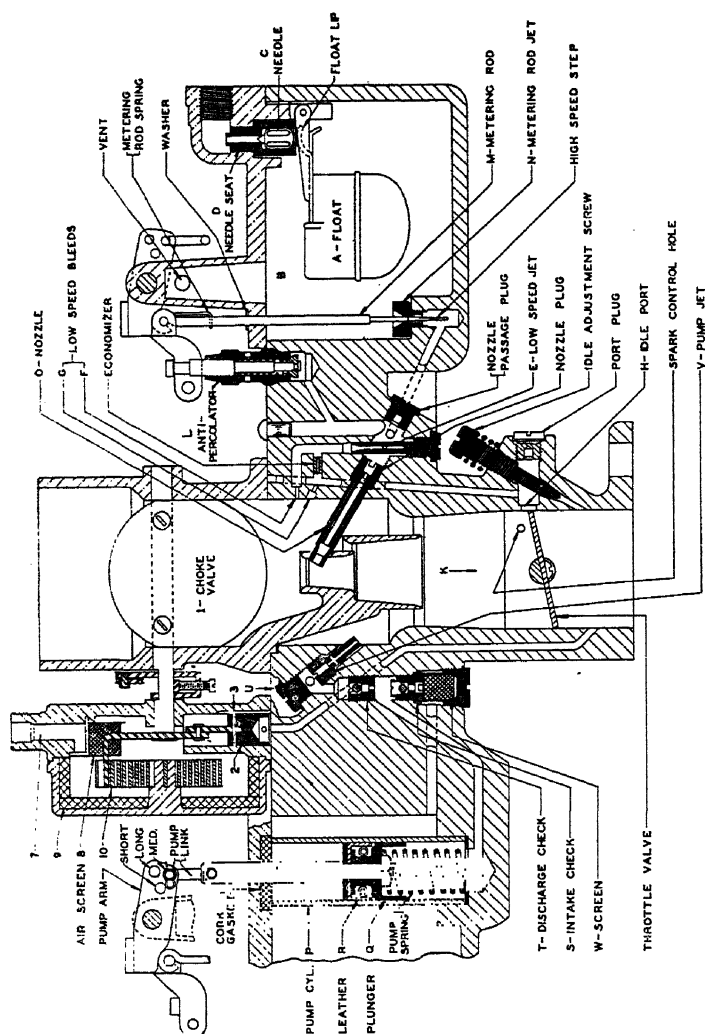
The Carter Carburettor with Thermostatic Air Choke and other refinements.
